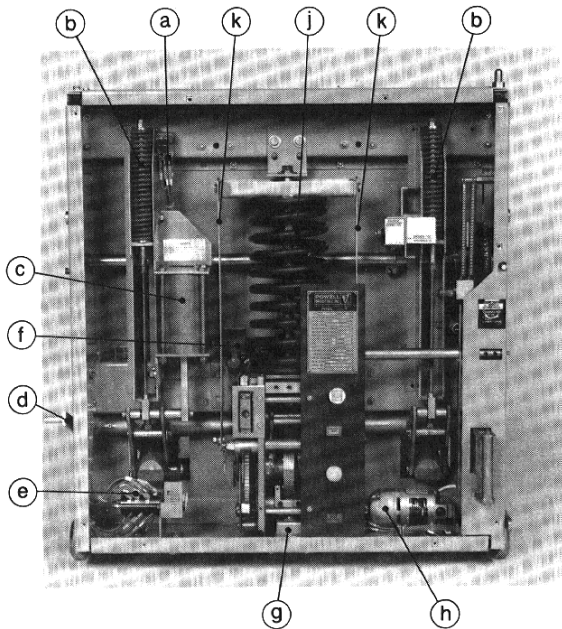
Front View of a POWL-VAC Circuit Breaker with Cover Removed
